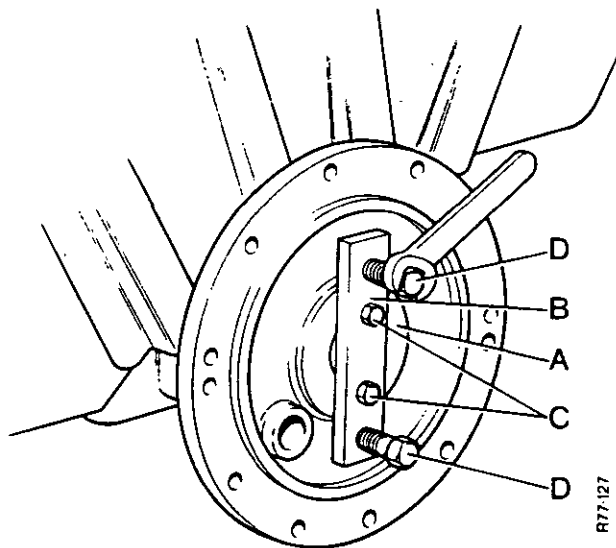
REMOVING THE OIL SEAL HOUSING
